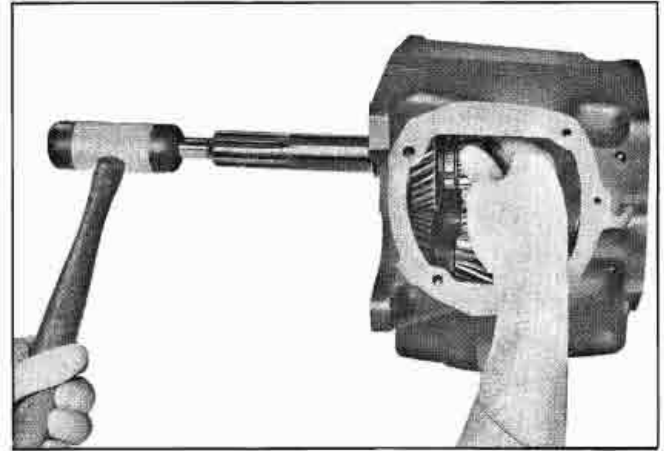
Removing Clutch Gear and Bearing Assembly
